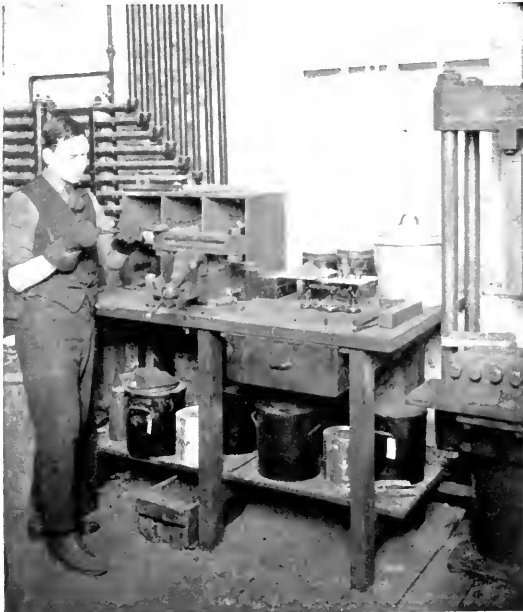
MOLD AND HYDRAULIC PRESS FOR MAKING RODS FROM TUNGSTEN AND MOLYBDENUM POWDER. The operator is removing a rod from the mold after pressing in the hydraulic press at the right.
